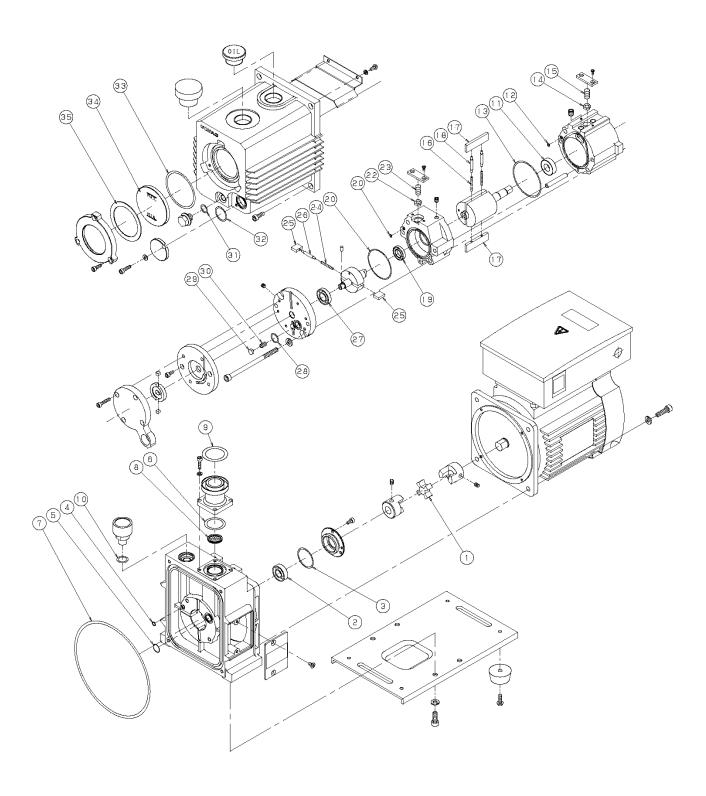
Disassembly drawing of GLD-040 oil sealed rotary vacuum pump
